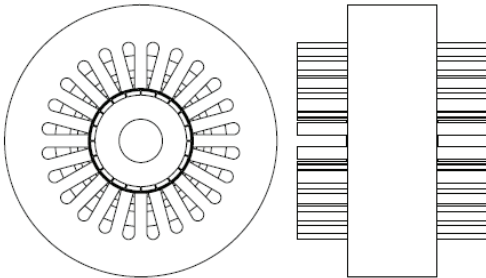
Geometry outline of IPM single bearingless motor unit.
